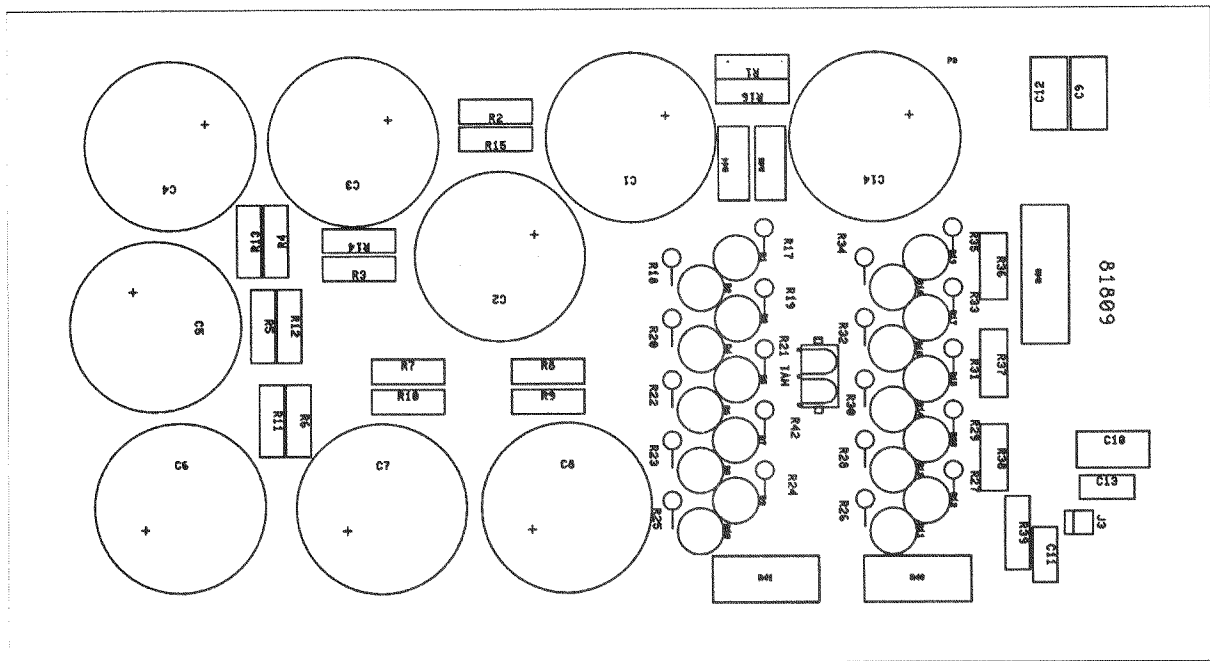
HIGH VOLTAGE RECTIFIER BOARD COMPONENT LAYOUT TOP VIEW
